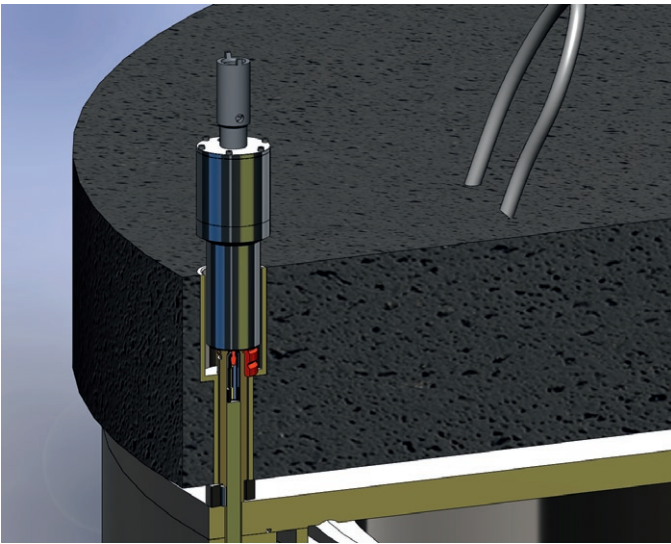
Sealing of Constor® containers (reading head in position above the seal)
